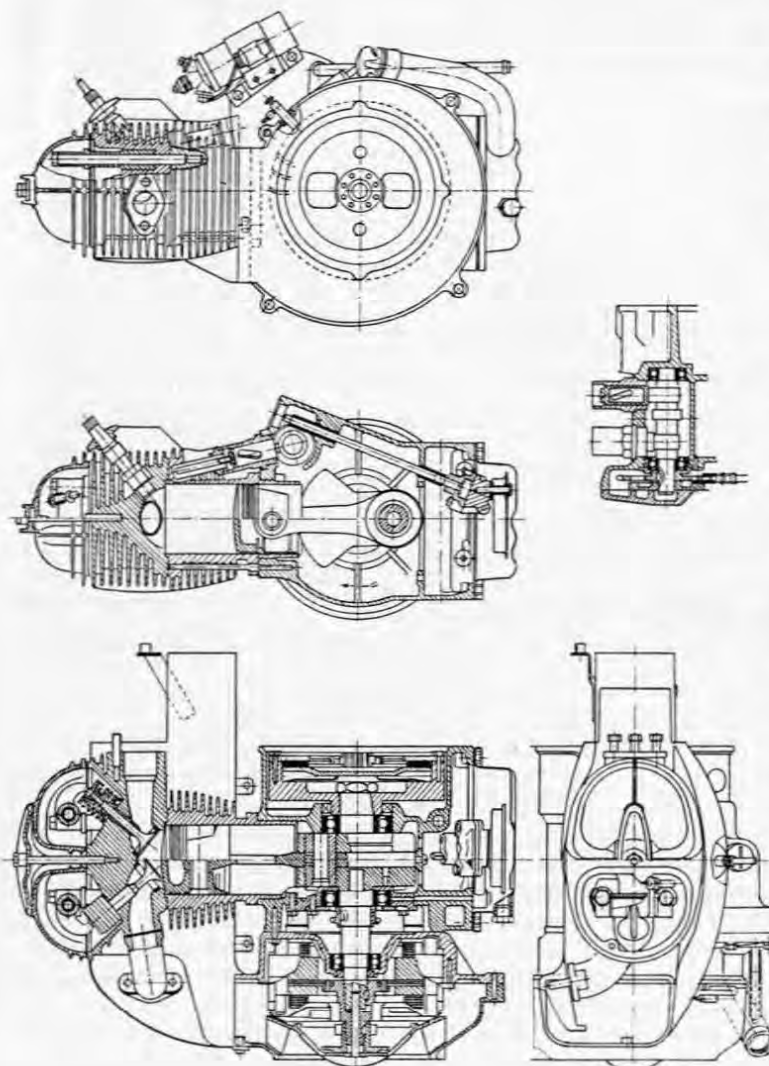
Sections of an air-cooled BMW engine, bore 72 mm, stroke 73 mm, performance 13 b.h.p. at 5,800 rev/min.
